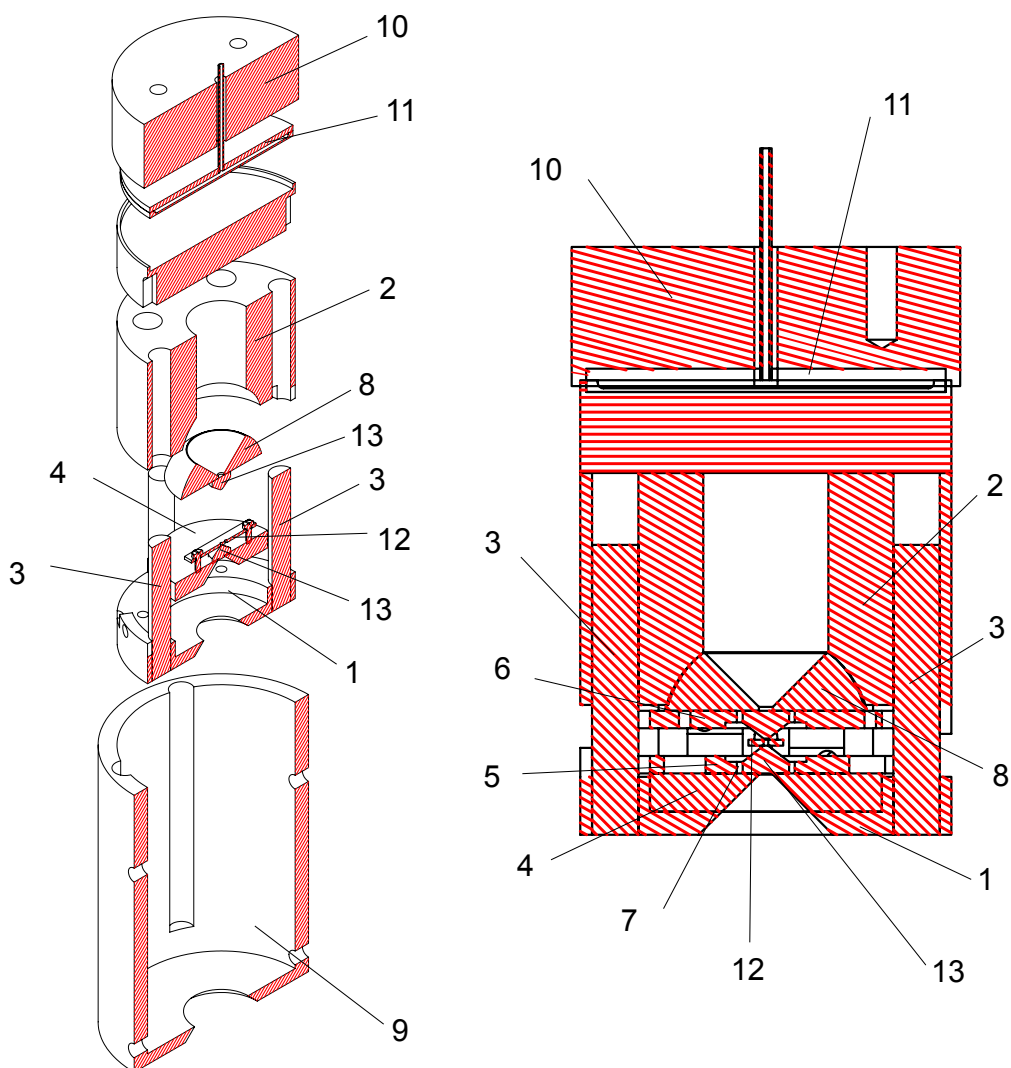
Sketch of the high pressure cell. 1 Base disk with four pins; 2 Piston with the holes for the pins; 3 pins; 4 tungsten-carbide disk supporting the lower anvil; 5 and 6 copper-beryllium disks used as holders for the anvils; 7 copper ring used to attach the anvils to the anvil-holder; 8 tungsten-carbide hemisphere supporting the upper anvil; 9 copper-beryllium container; 10 copper-beryllium screw used to clamp the cell in the container; 11 Stainless steel membrane operated with He gas; 12 gasket; 13 anvils.
